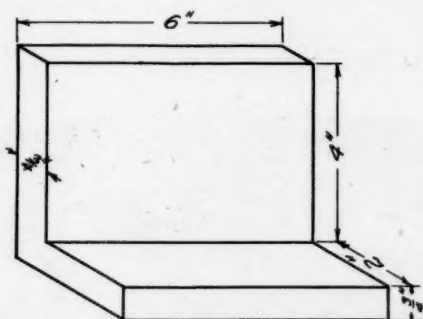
SKETCH OF TEST SLAB USED IN HEAT TEST
